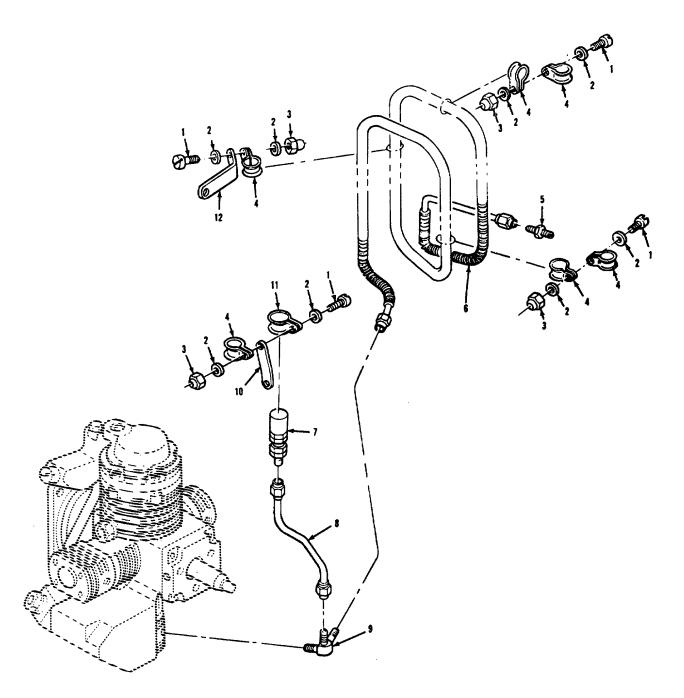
Second stage cooler, first stage cooler, aftercooler tube, and related partsexploded view
